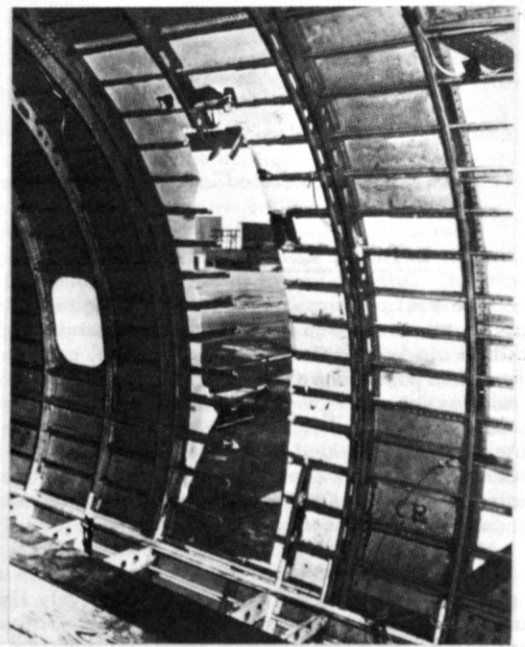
Results of Pressure Shell Damage Tolerance Test
